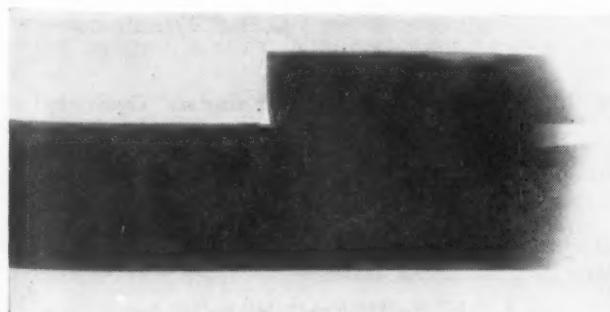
RADIOPHGRAPHS OF COLD-SET DIAMOND TOOL
